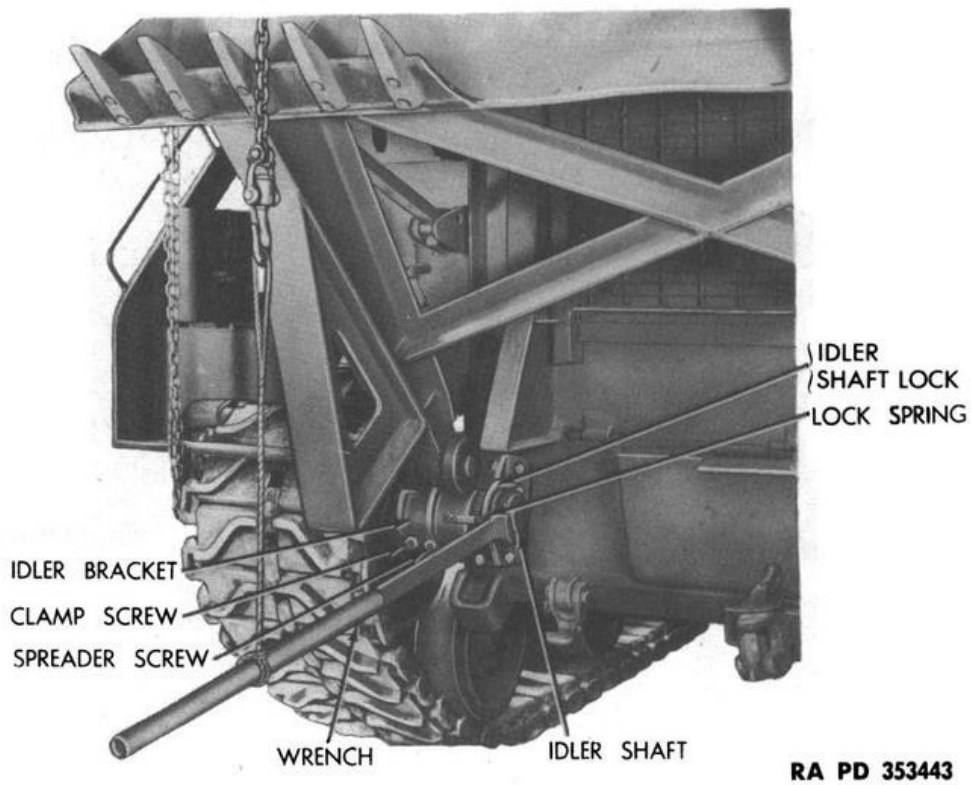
Adjusting track tension with wrench (41-W-640-400).
